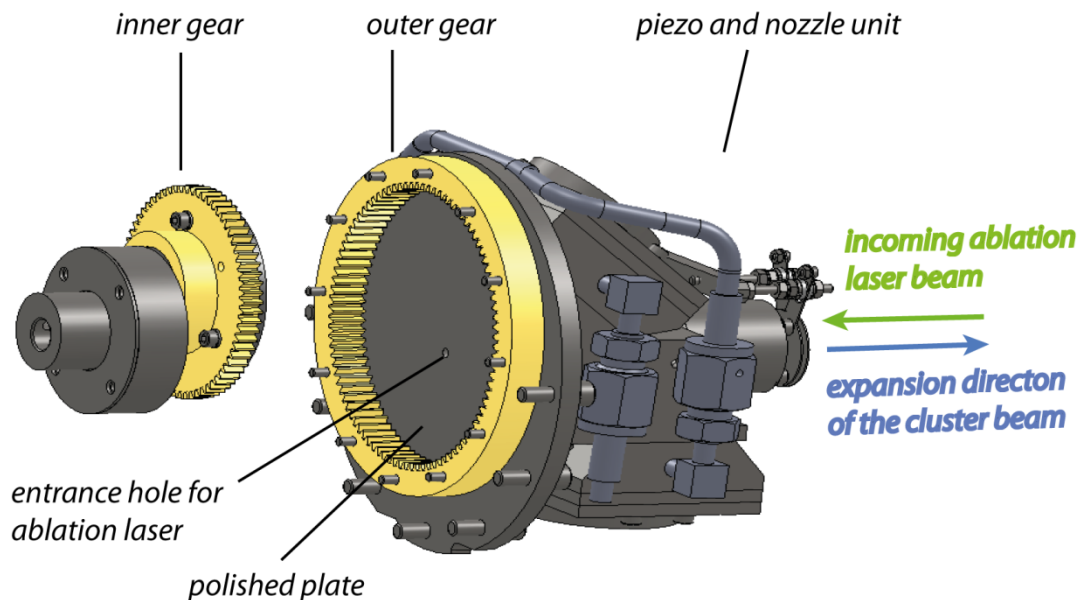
Gear assembly with the inner gear rotating inside the outer gear on a polished plate. The off-axis entrance hole for the ablation laser enhances the usage of the target area.
